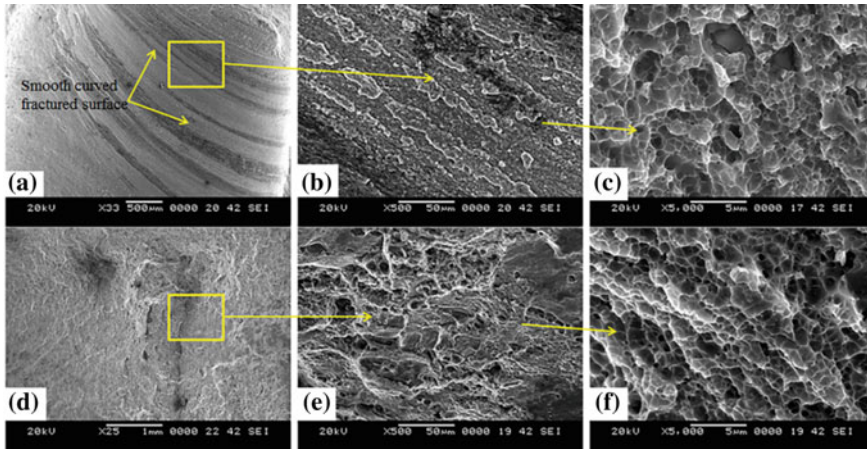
Fracture surface appearance of FSW joint specimen for tool offset distance of a–c 1 mm towards AA2024-T351, d–f 1 mm towards AA7075-T651
